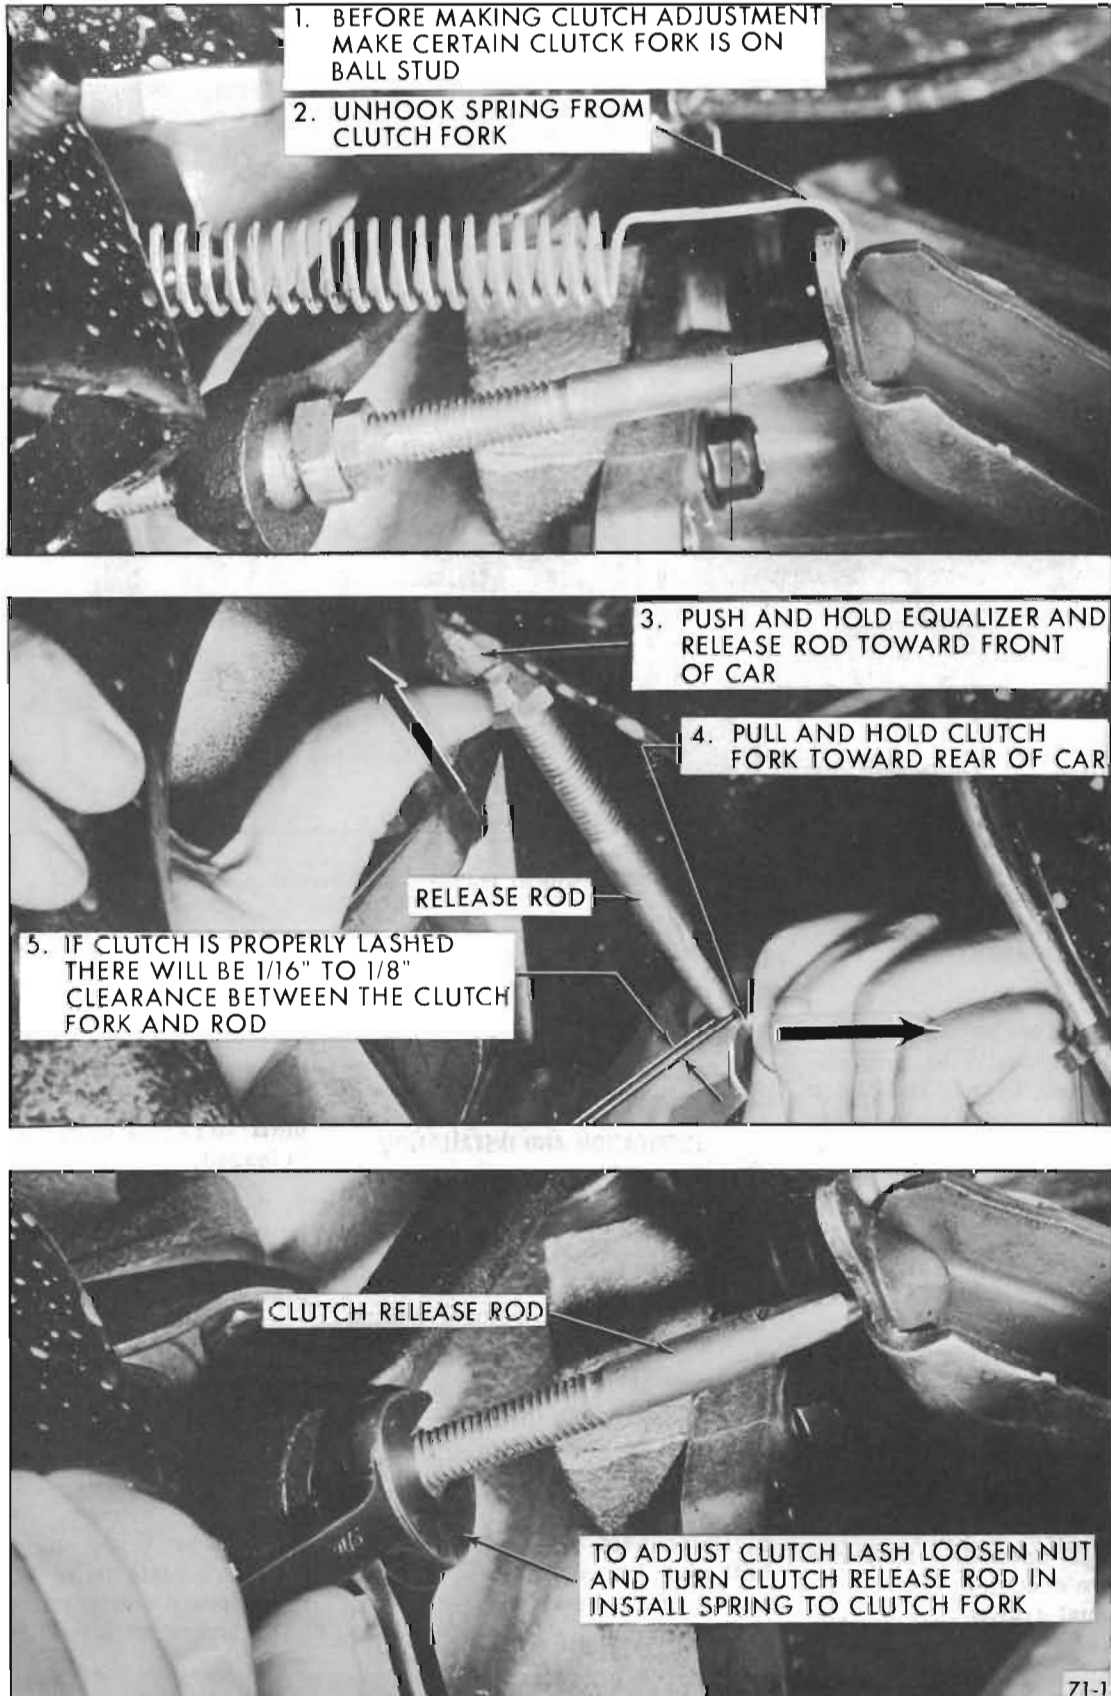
Clutch Lash Adjustment (43-44000 Series Only)
